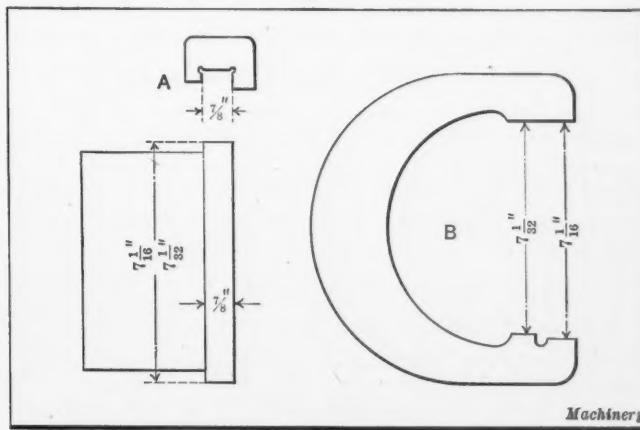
(A) Gage for Width of Flange. (B) Limit Snap Gage for Flange Diameter
